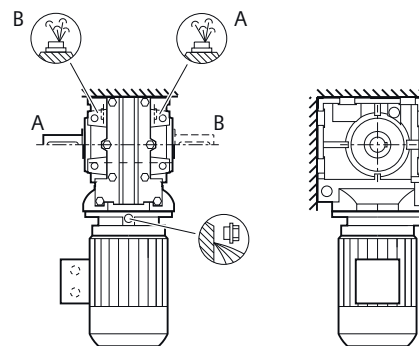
Mounting positions for helical worm gearbox CF flange-mounted design and CAZ housing flange, sizes 39 - 89
